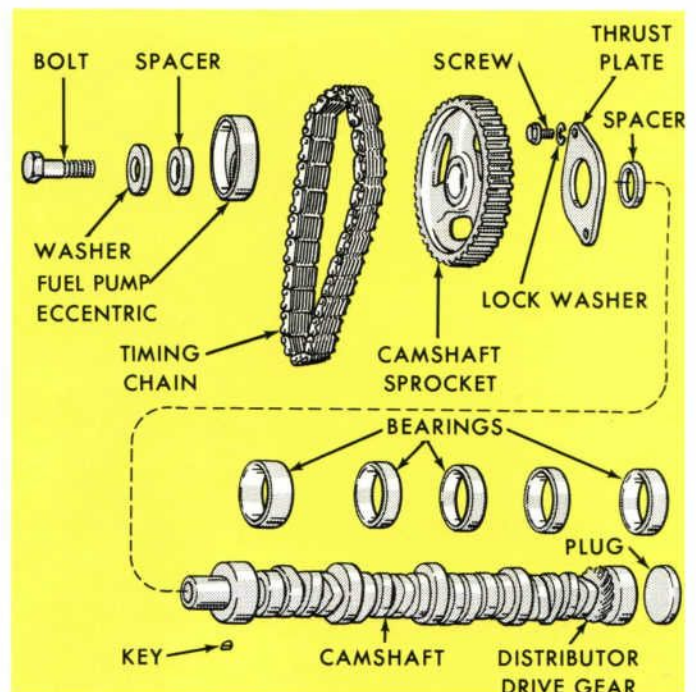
TYPICAL CAMSHAFT AND RELATED COMPONENTS
